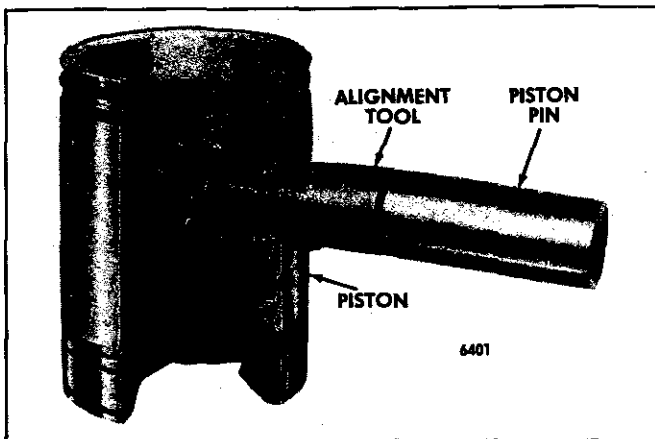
Installing Piston Pin Using Alignment Tool J 35619
